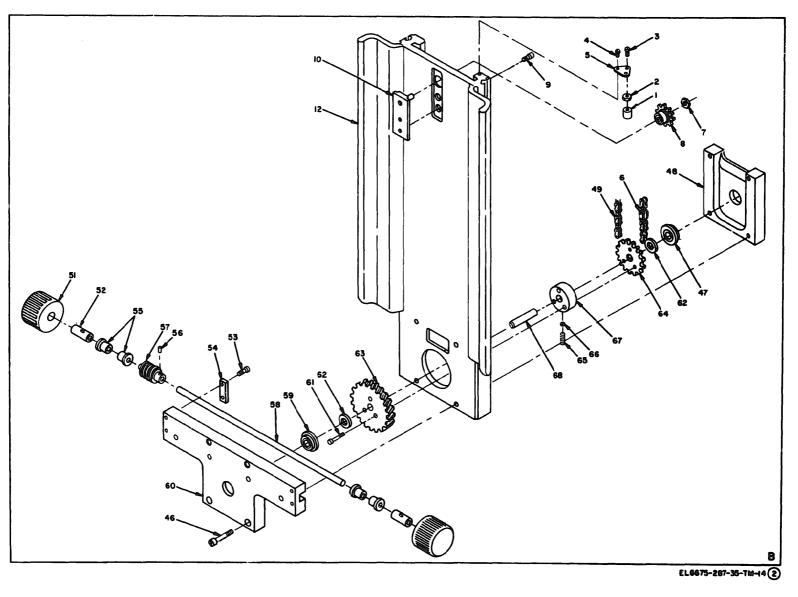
Disassembly of Z-travel carriage, exploded view (part 2 of 3).
